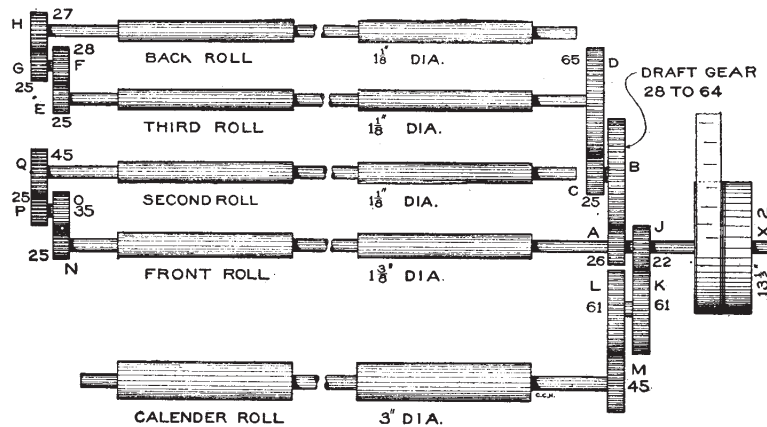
Diagram of Drawing Frame Draft Gearing.
